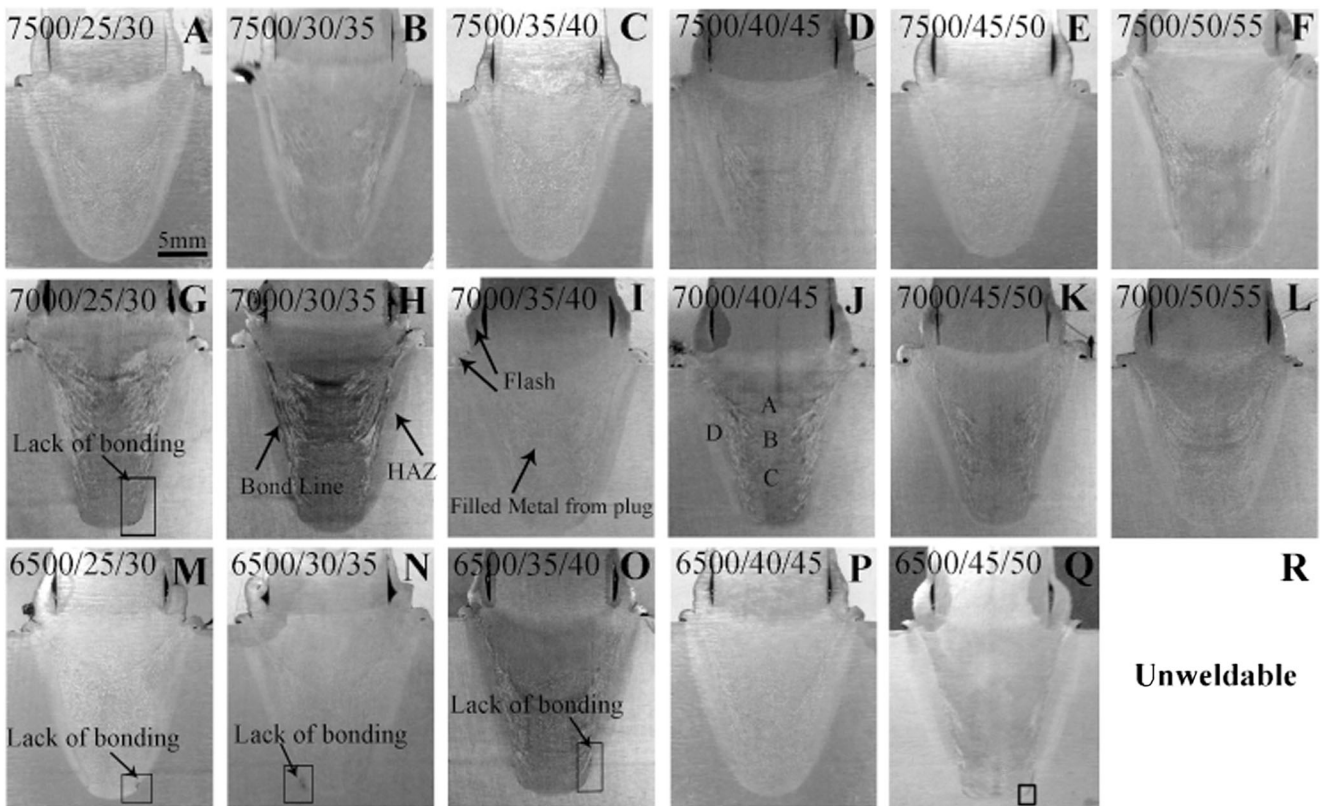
Cross-sections of weld samples for all the successful welding conditions with type G hole and plug
